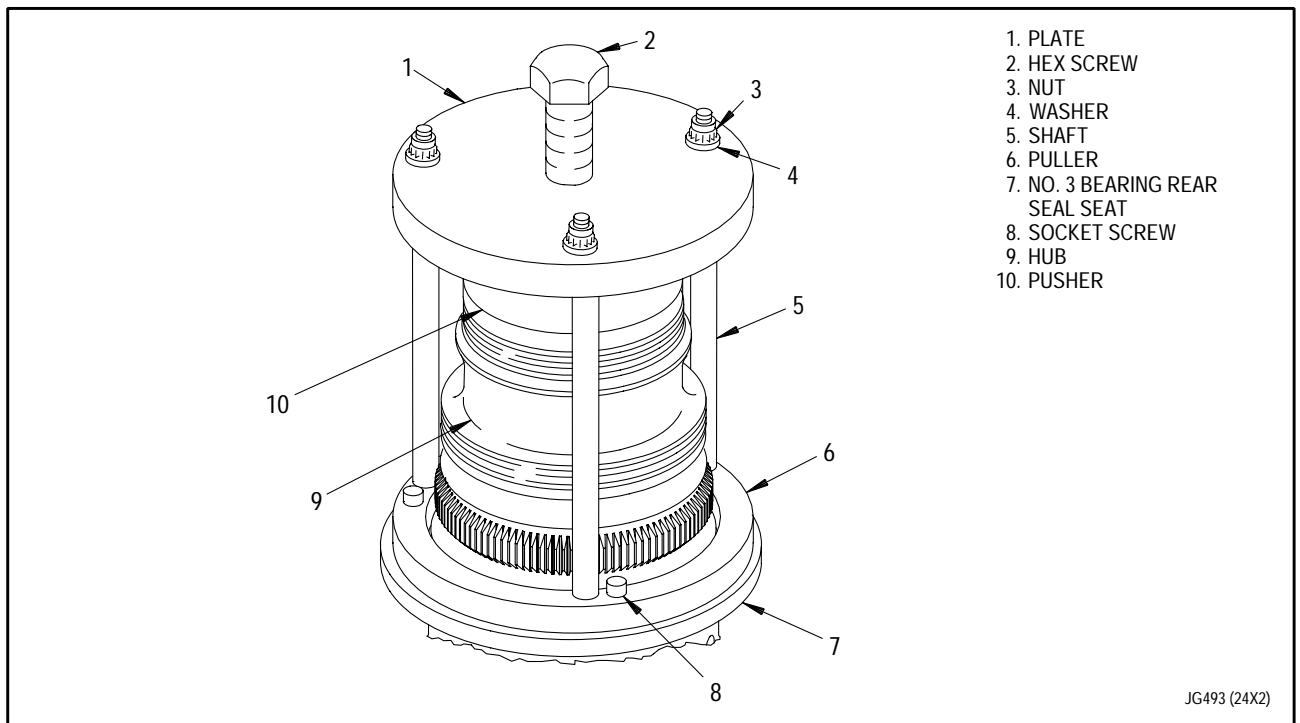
No. 3 Bearing Rear Seal Seat - Removal With PWA 50635 Puller
